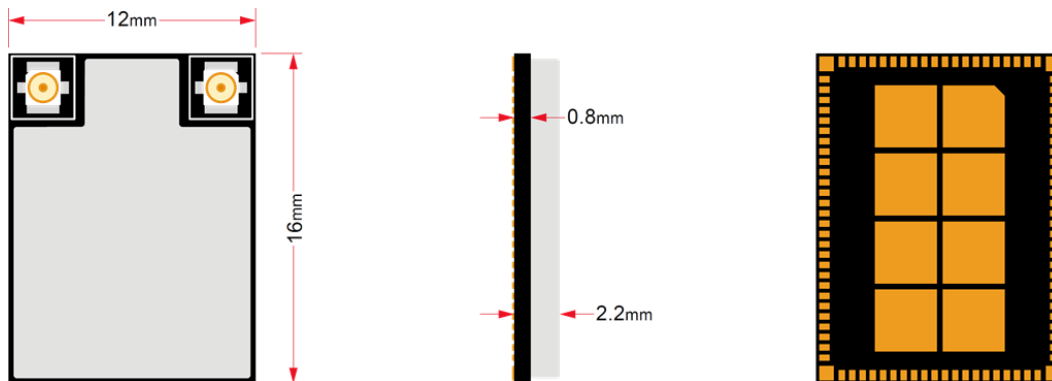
MQC2072 M.2 Soldered-down Type 1216 Module View
